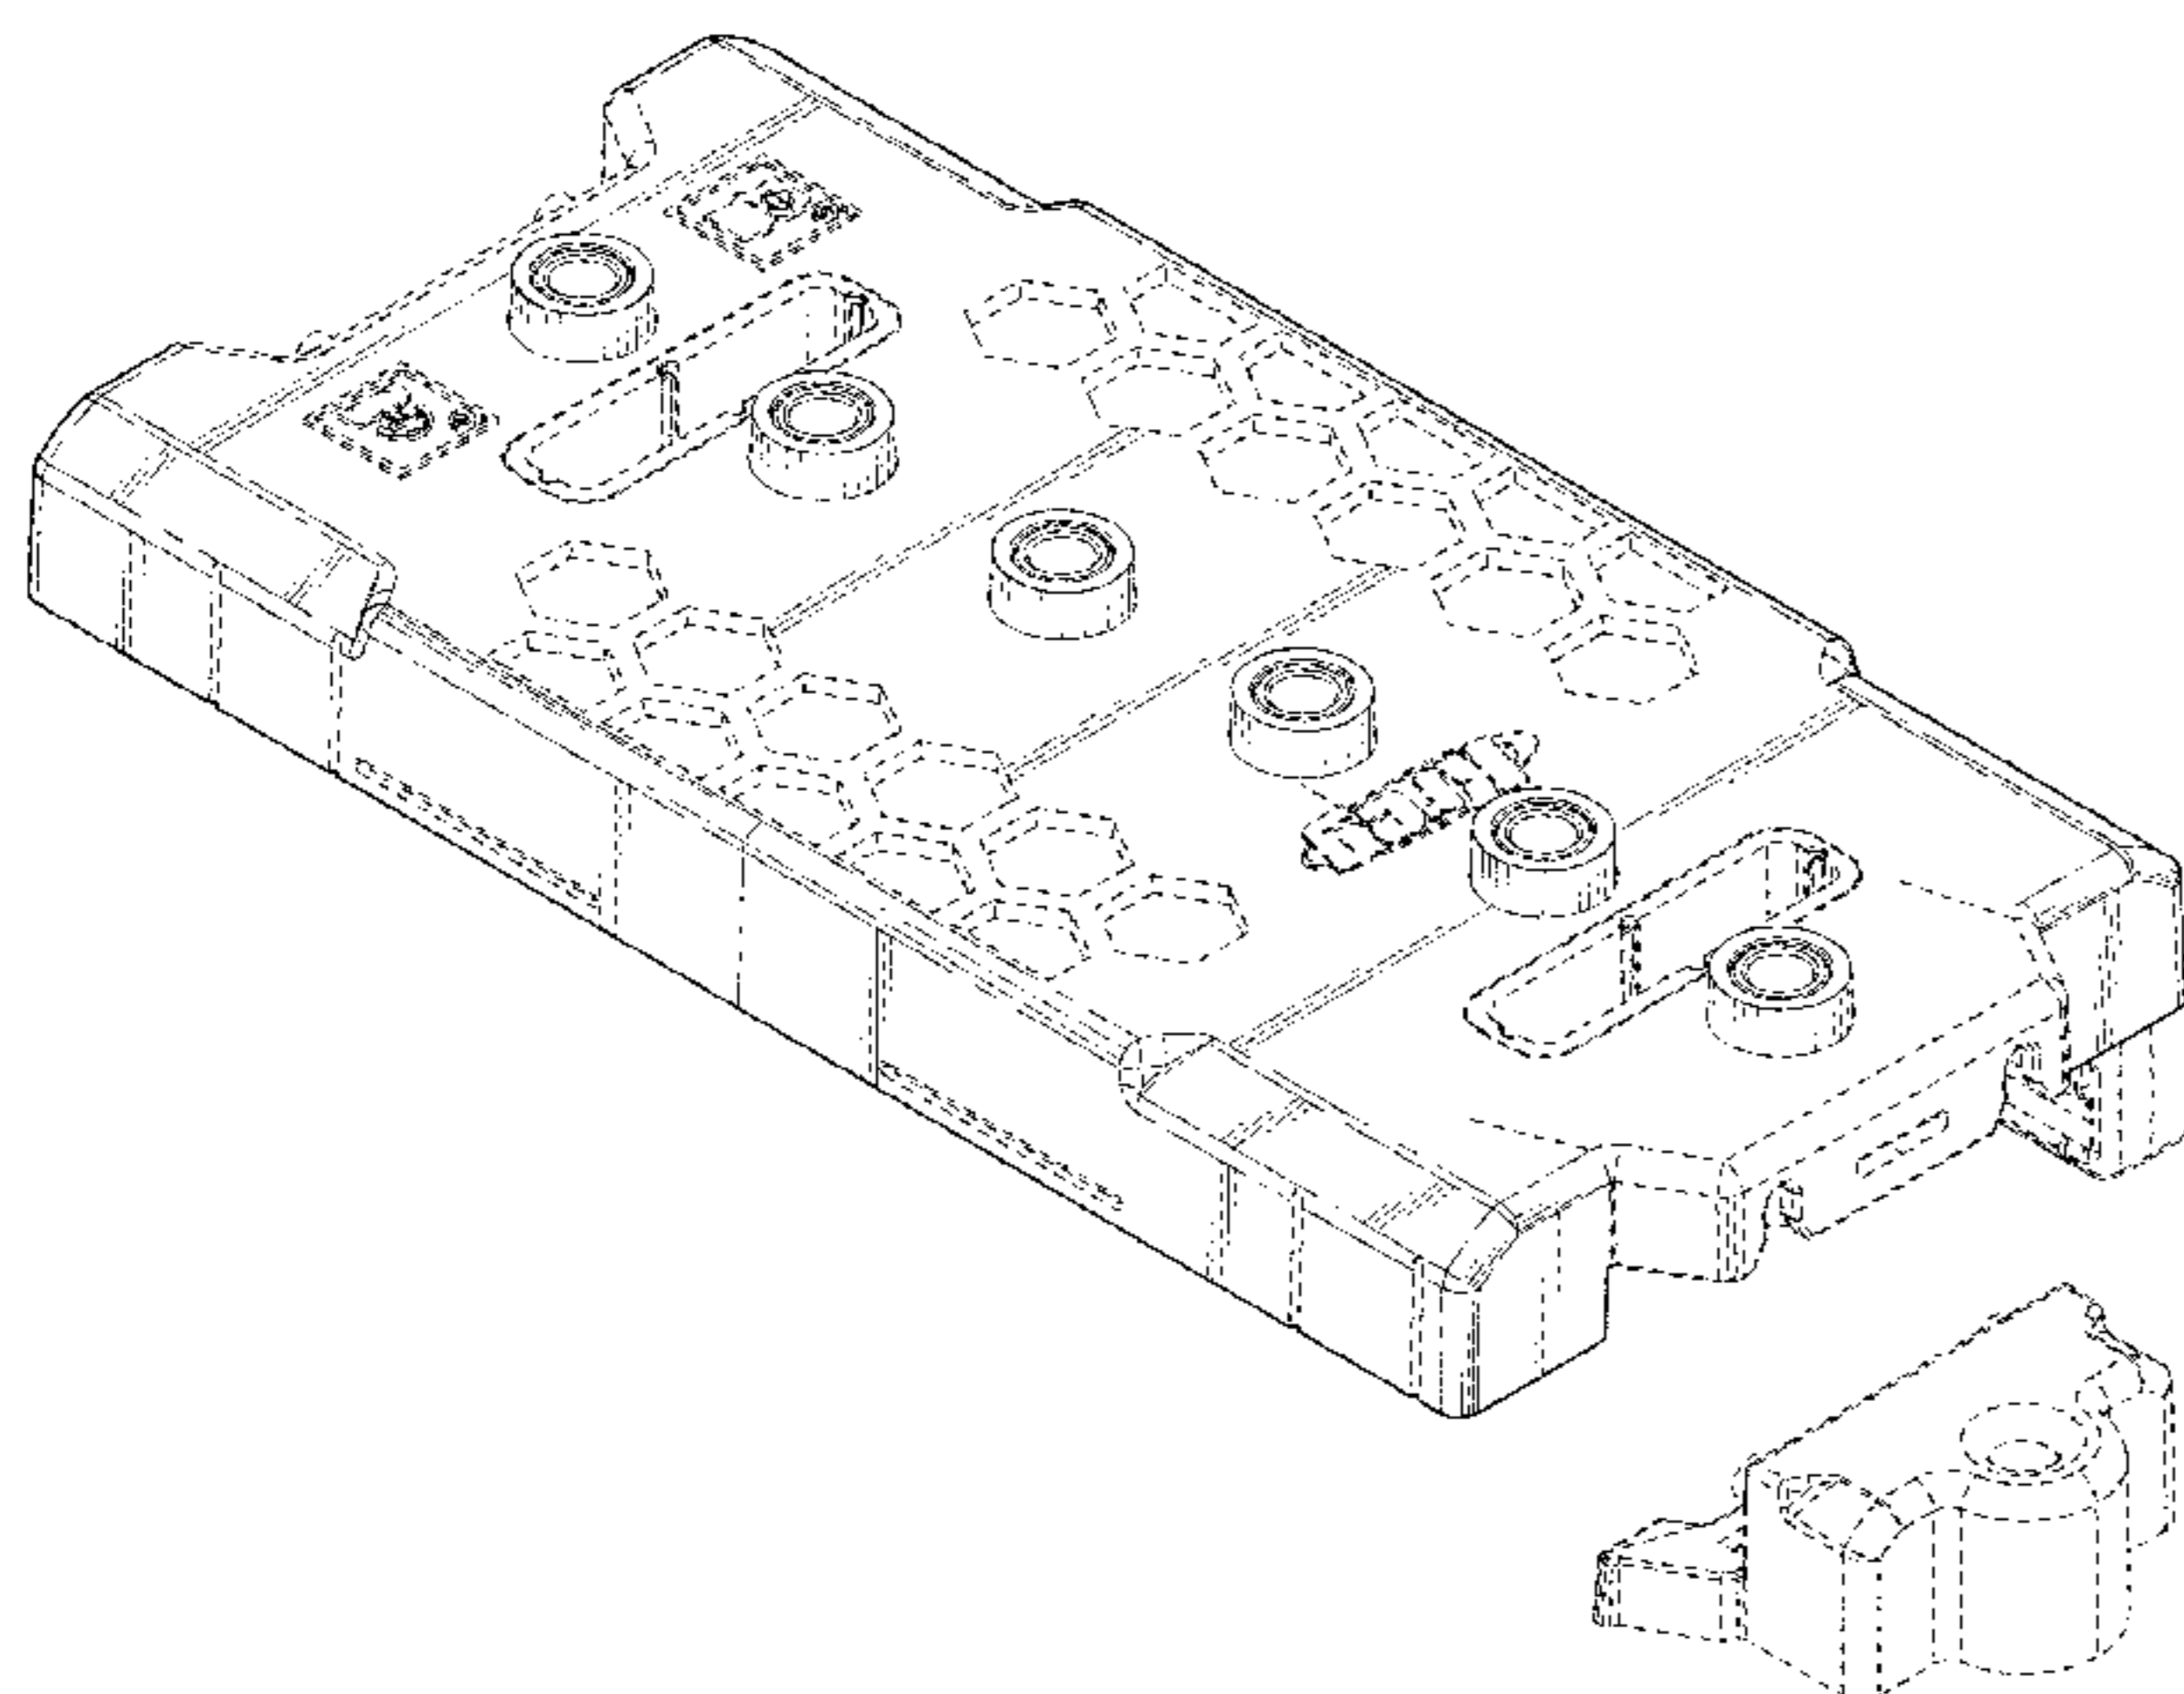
is a perspective view of the bottom, back, and left sides of the shelf pin hole jig.
